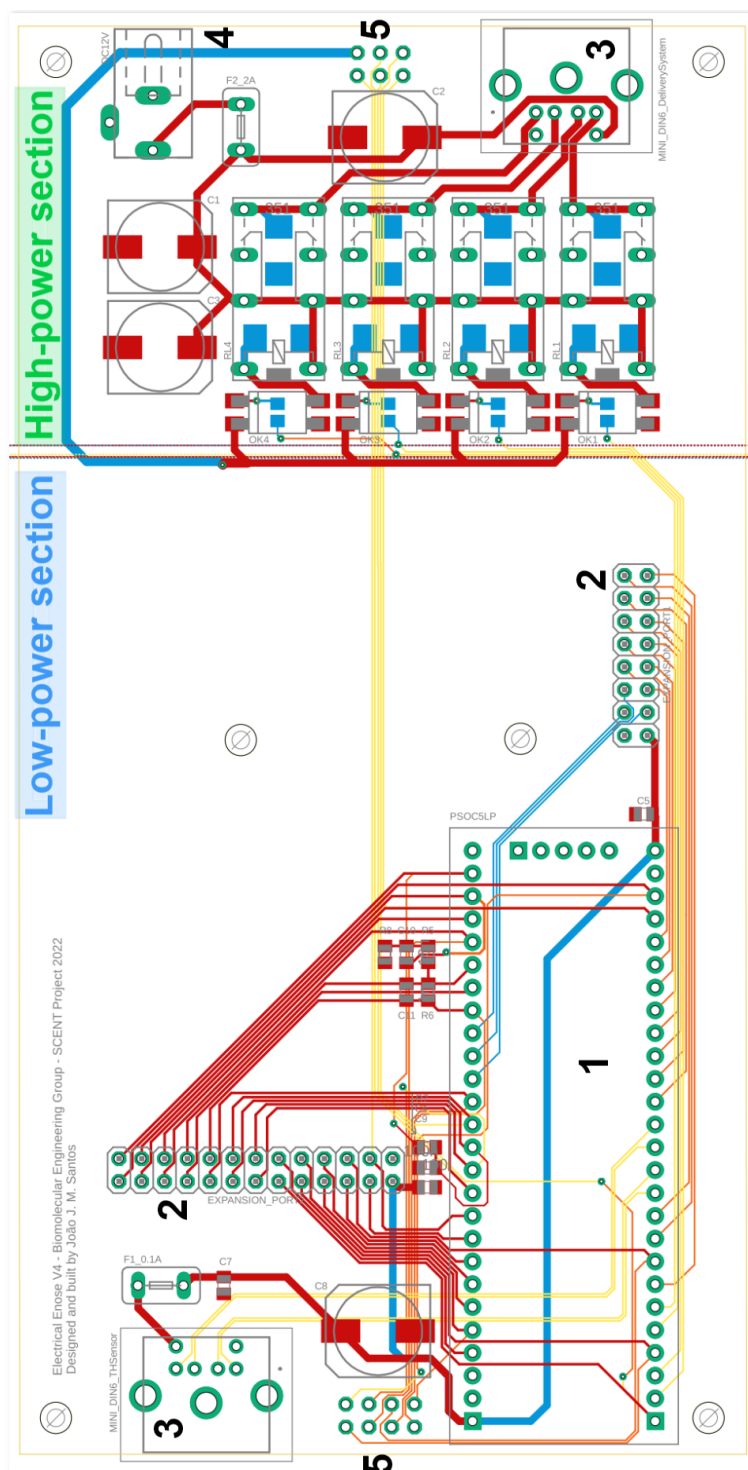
Main PCB design. Labels: 1-PSoC 5LP; 2-expansion ports; 3-mini DIN connectors; 4-DC power input; 5-connectors for sensor detection chamber adapter PCB.
